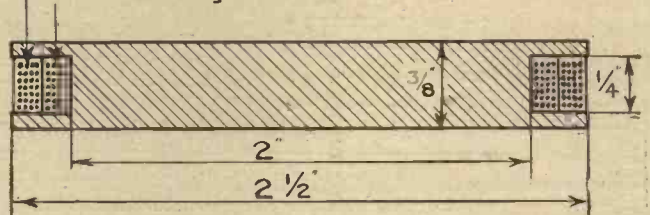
Dimensions of the former carrying the oscillator coils.
